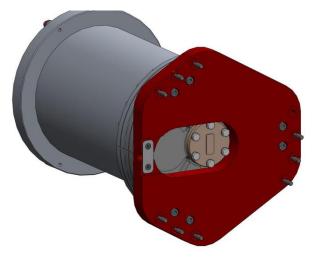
Cable Restraint holds cable to Adapter Plate on Horizontal GS-13 Assemblies. (Cable not shown here.)
